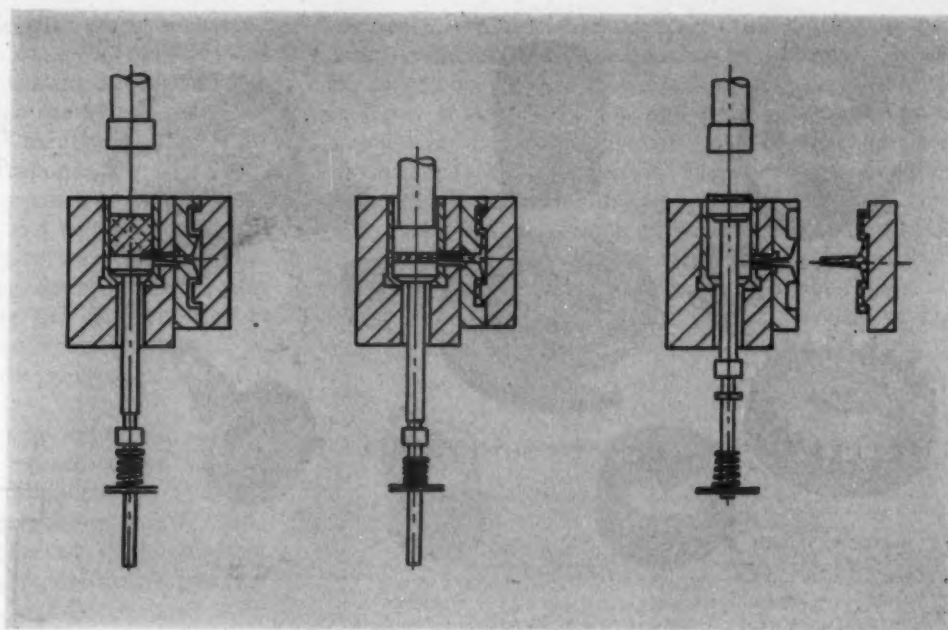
Cross sections showing casting sequence with typical vertical cold-chamber die casting machine
